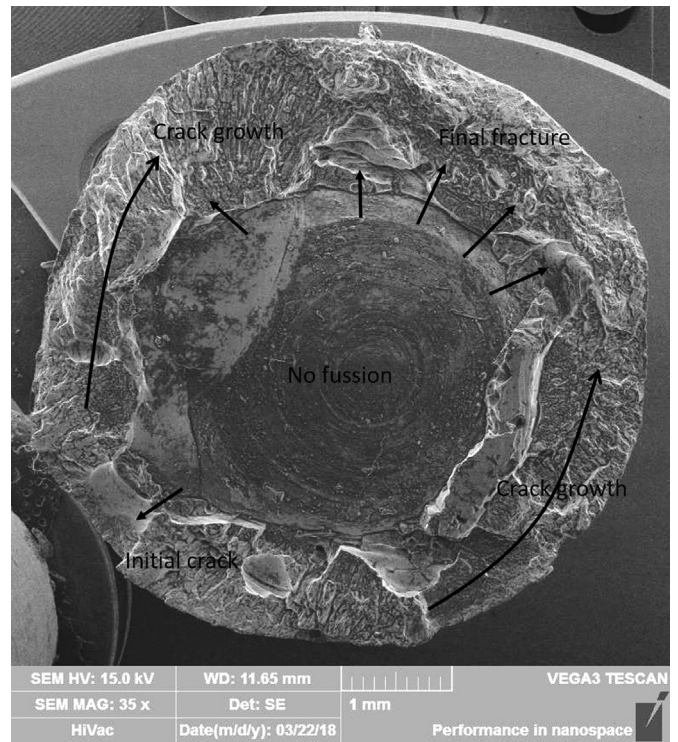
Fracture surface of fatigue test for underwater weld in depth of 5 m.
